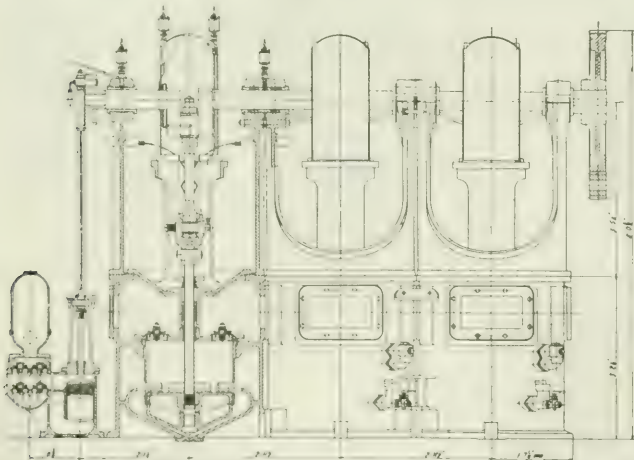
SURFACE CONDENSING EQUIPMENT SHOWING SECTION THROUGH "EDWARDS" AIR PUMP.
